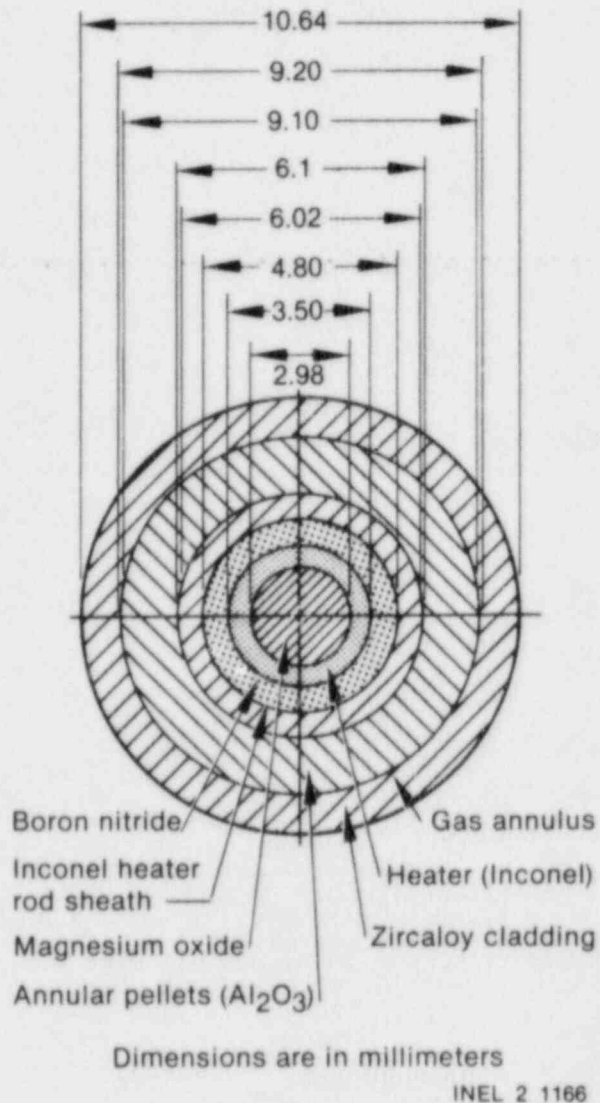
REBEKA heater rod cross section at 1950-mm elevation.
